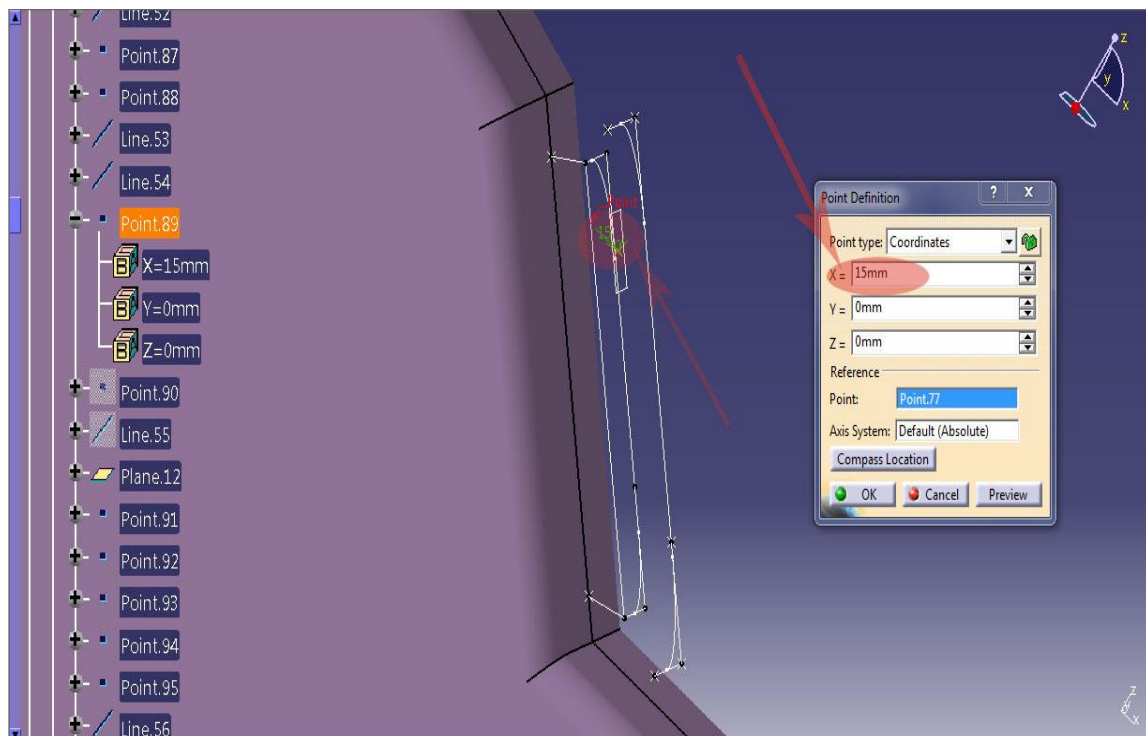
Touch screen's wireframe – plane's inclination.
